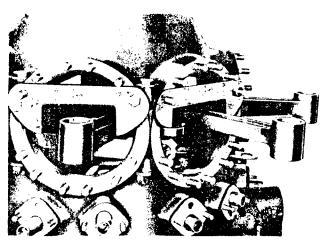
Main Crankcase Assembly Showing Articulating Rod Protector Straps
